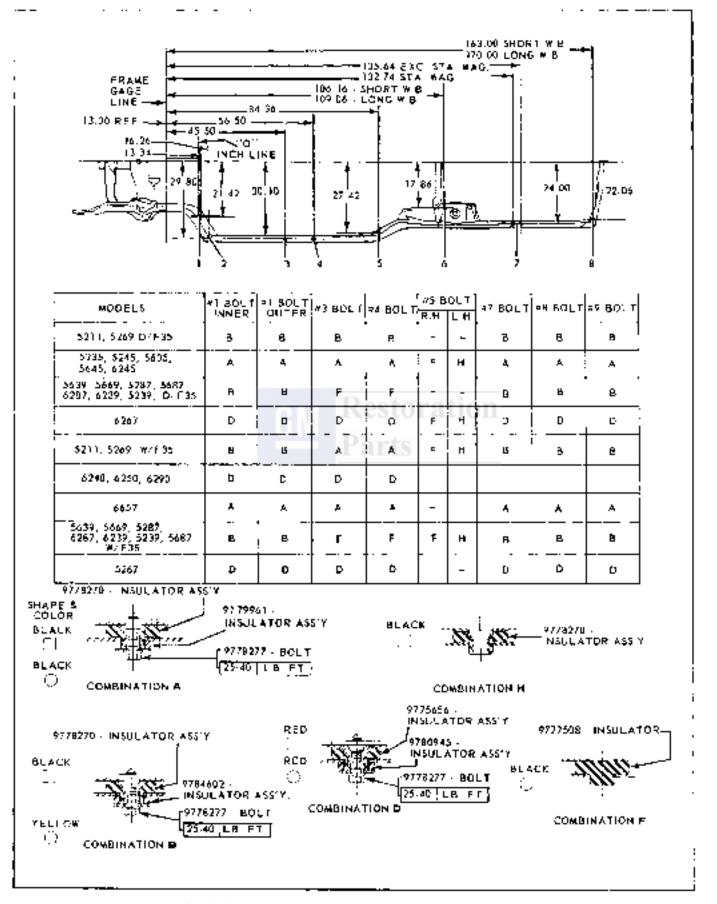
Pointing Body Bolts and Frame Cauge Line Dimensions
